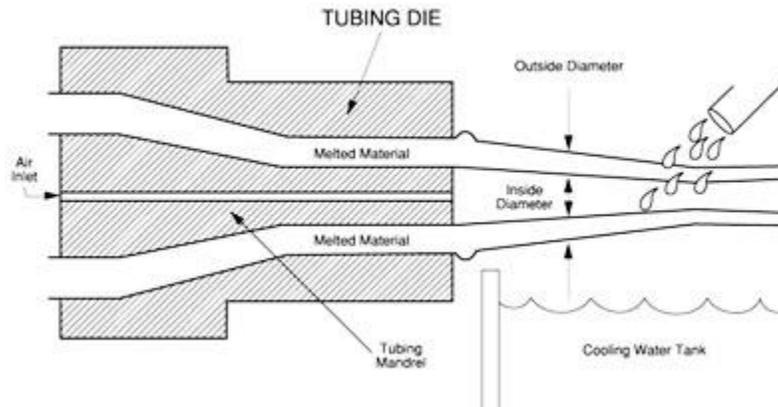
Profile extrusion process (Industrial Extrusion Machinery, 2019).
